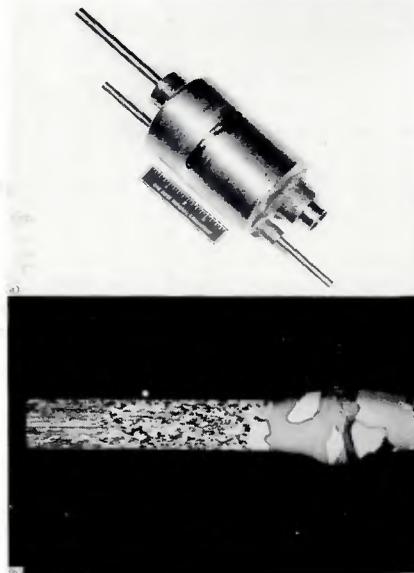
(a) Back-extruded molybdenum half sections joined by a manual gas tungsten-arc weld. (b) Cross section through this weld. Etchant: 20 vol % H_2O_2 —10 vol % H_2SO_4 (96% H_2SO_4) — 70 vol % H_2O . X6, reduced 65 %
